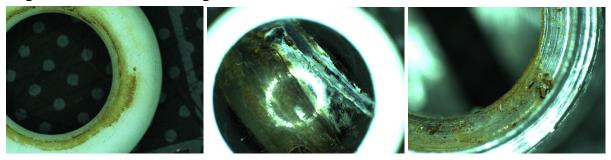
rust on checkvalve parts (O-ring, valvebody, sleeve)
